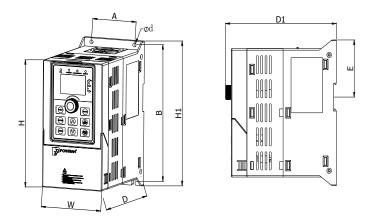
11kW G3 above Product outside drawing, installation dimension 7-1-2.PI500 series
